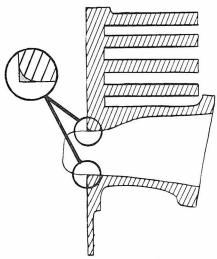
Manufacturers of some twostroke cycle engines recommend that top and bottom edges of ports be chamfered (as shown in the inset) after reboring to prevent piston rings from catching on the sharp edges of ports.
